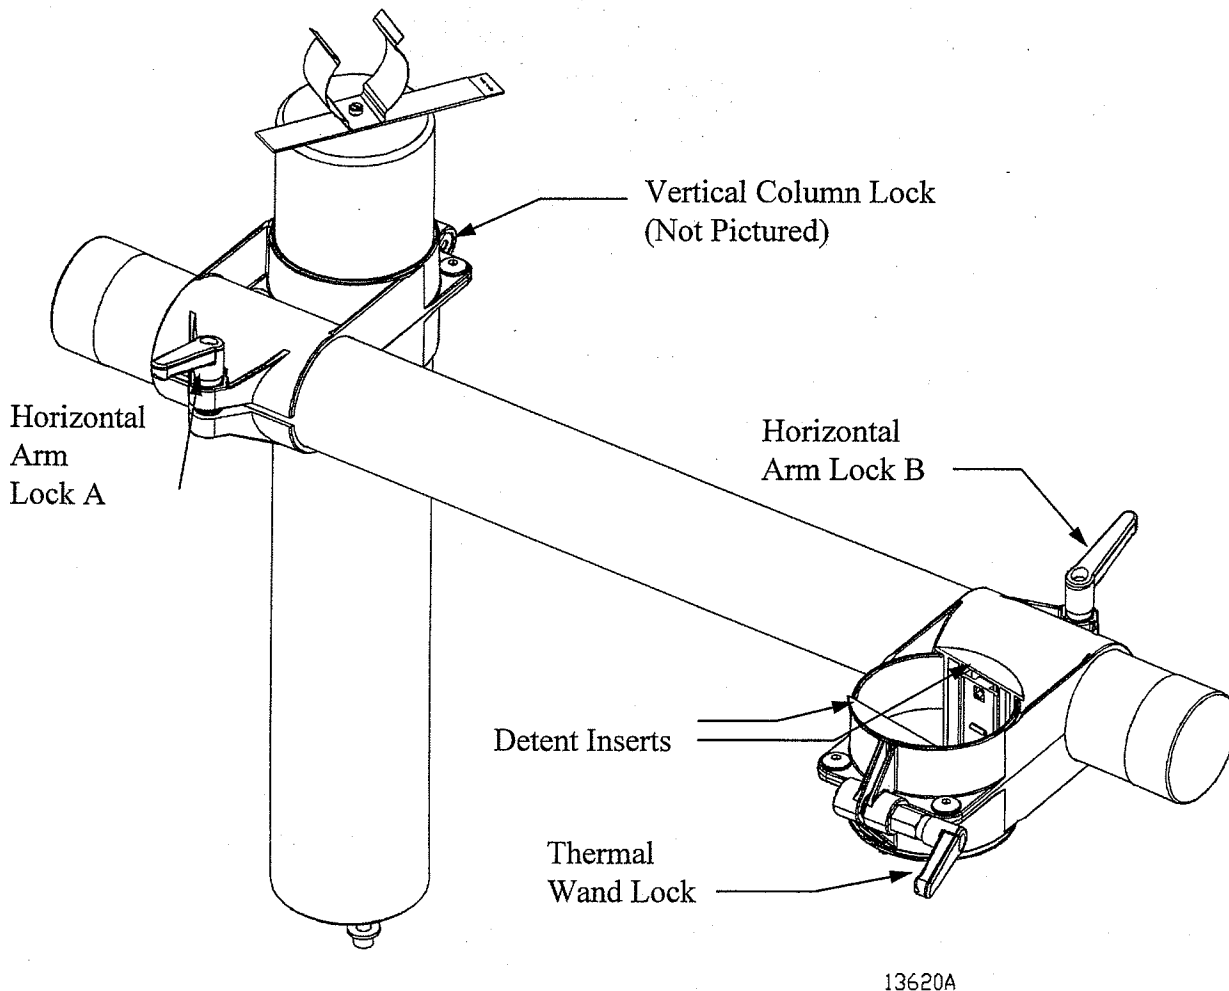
Thermal Wand Stand: Assemble Horizontal Arm, Locks
